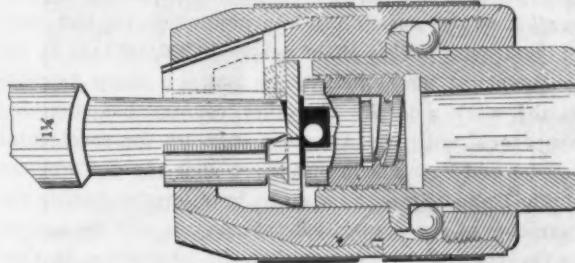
Longitudinal Section of the New Morrow Drill Chuck.
